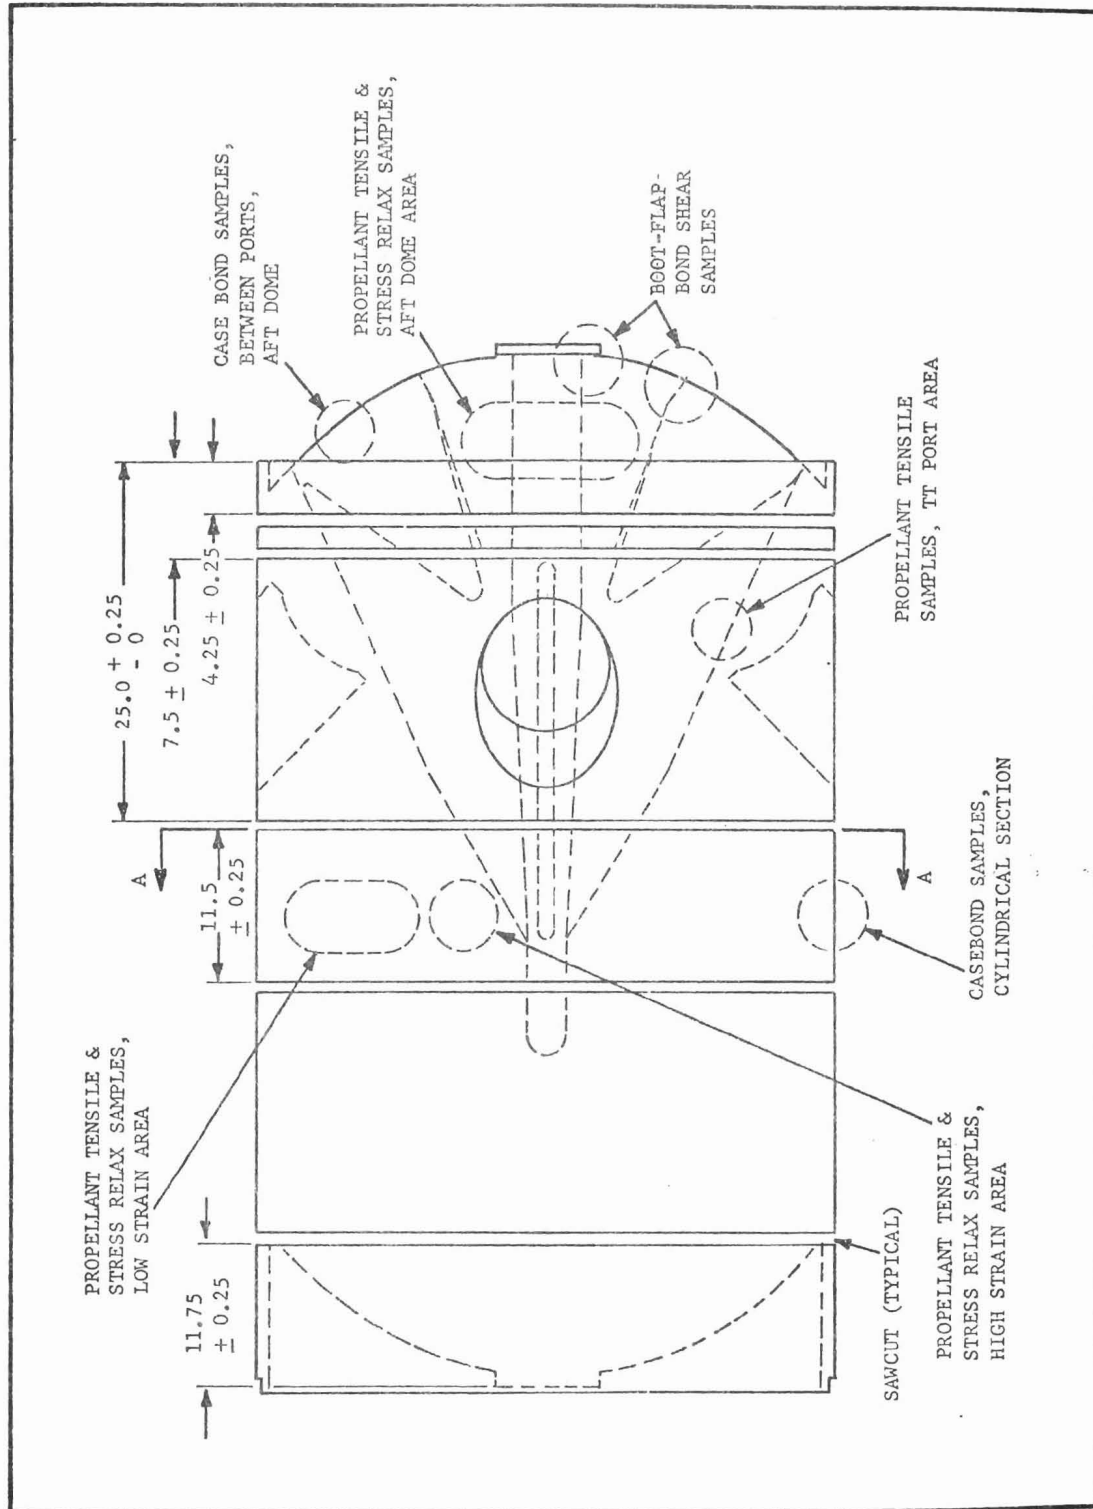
A. Minuteman Third Stage Sectioning Plan
